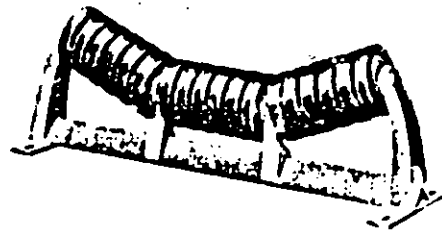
20° troughing belt rubber cushion impact idler
